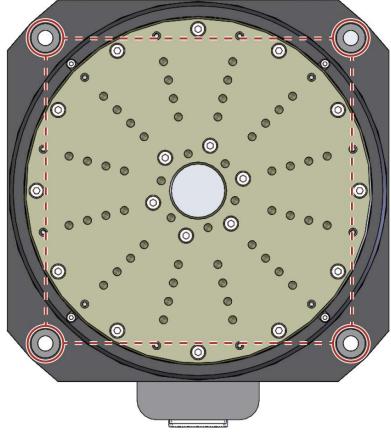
Top View of an ABRS250MP Stage Showing Mounting Holes
